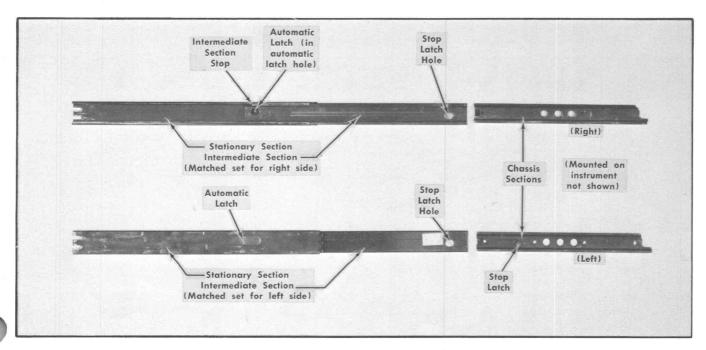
Illustration showing the 1 3/4-inch wide slide-out track assemblies.
